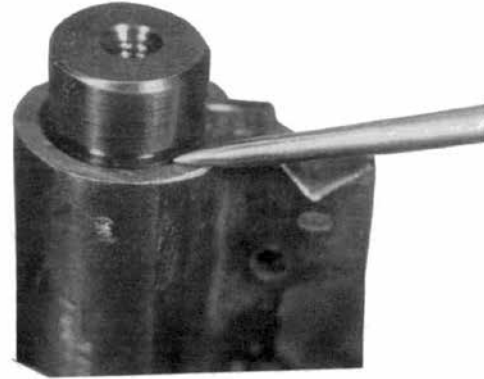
Lathe-cut grooves accurately indicate chamber length when placed in a clean chamber. Forward groove measures  $2\frac{3}{4}$  in. chambers; the other groove measures 3 in. chambers.
